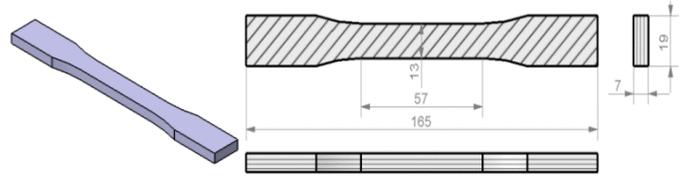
ASTM D638 TYPE-I TENSILE TESTING SPECIMENS (UNITS IN MILLIMETERS) [15].
